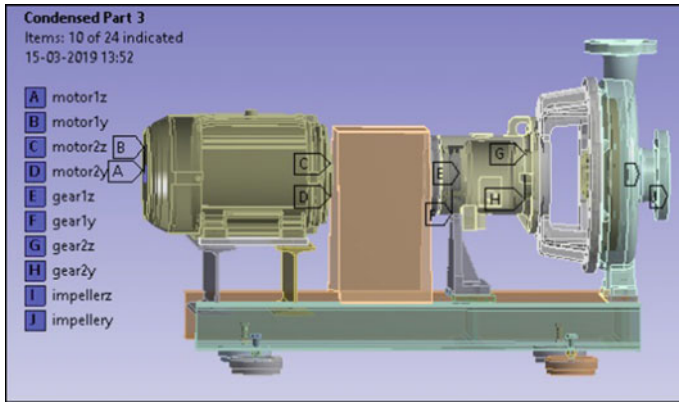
Stator (motor; base; gearbox; impeller housing)
